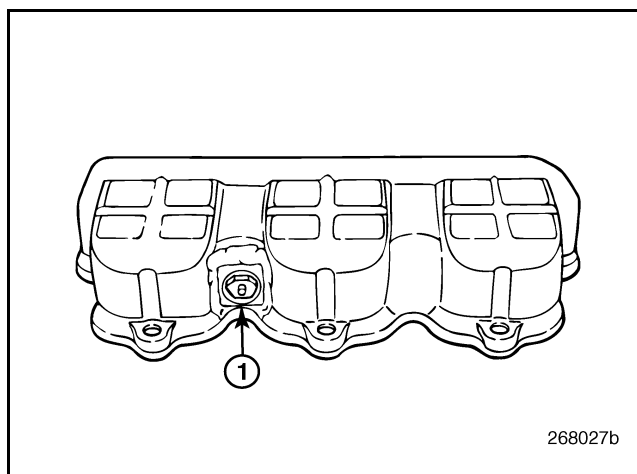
Cylinder Head Cover with Electrical Pass-Through Connection
